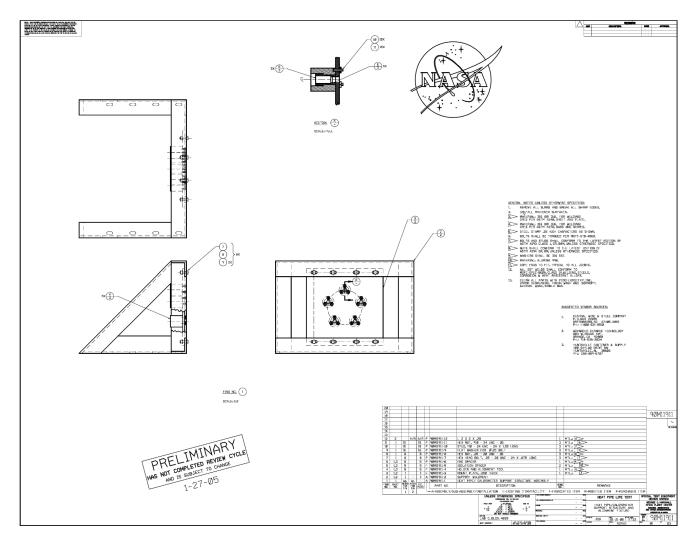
Heat pipe and calorimeter cluster attachment support and bracket assembly (Dwg. No. 90M11911).
